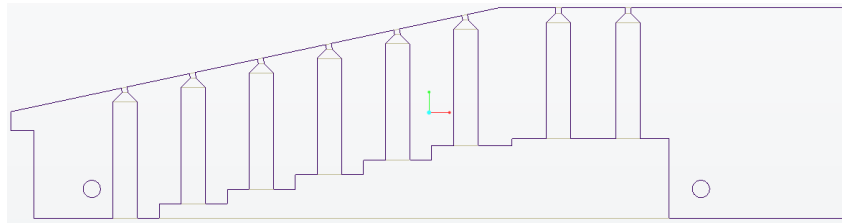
Cross-section of 3D printed ramp showing arrangement of transducer mounting. Note: additional transducers aren't added to the rear of the ramp to accommodate unstart injection port
